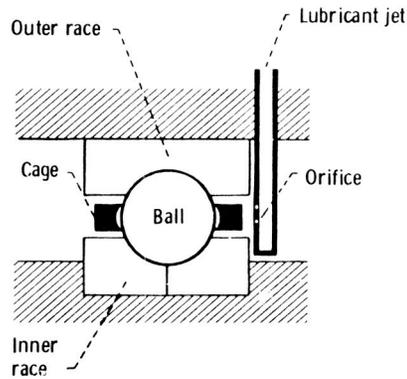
Bearing lubrication schematic. Number of jets, two per bearing; dual orifice; inner-land riding cage.
